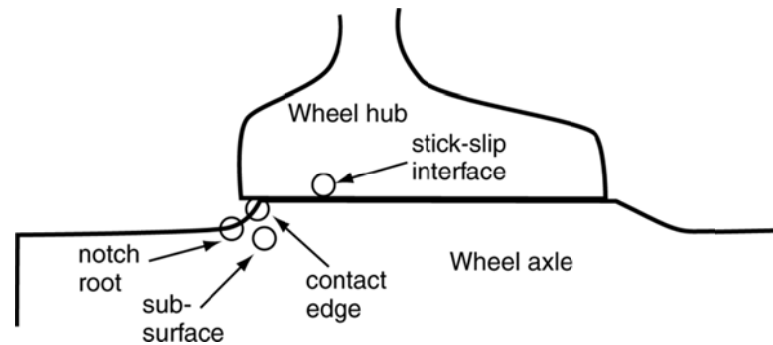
Possible locations of fatigue crack initiation in railway axle [Ekb-04]
